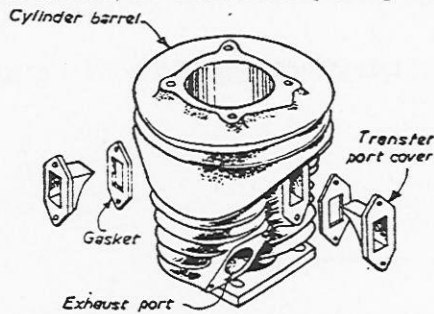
Details of the cylinder barrel, showing the position of the port covers.
